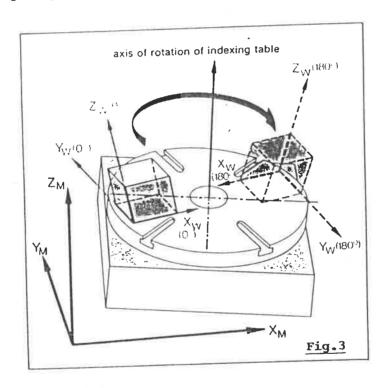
illustrates a testpiece mounted on a rotary indexing table. The testpiece need not be centred with respect to the indexing table axis. The eccentricity and skewness between the testpiece and the table axes can be initially determined and automatically compensated in later measurements. WCS is defined in 0° and 180° positions of the table; the symmetric line of the two Z-axes measured is the axis of the indexing table. After this initial calibration process, the measuring
